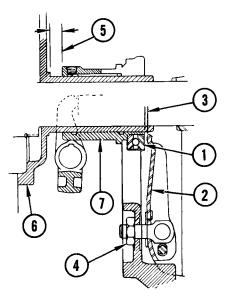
CLUTCH RELEASE BEARING ADJUSTMENT
